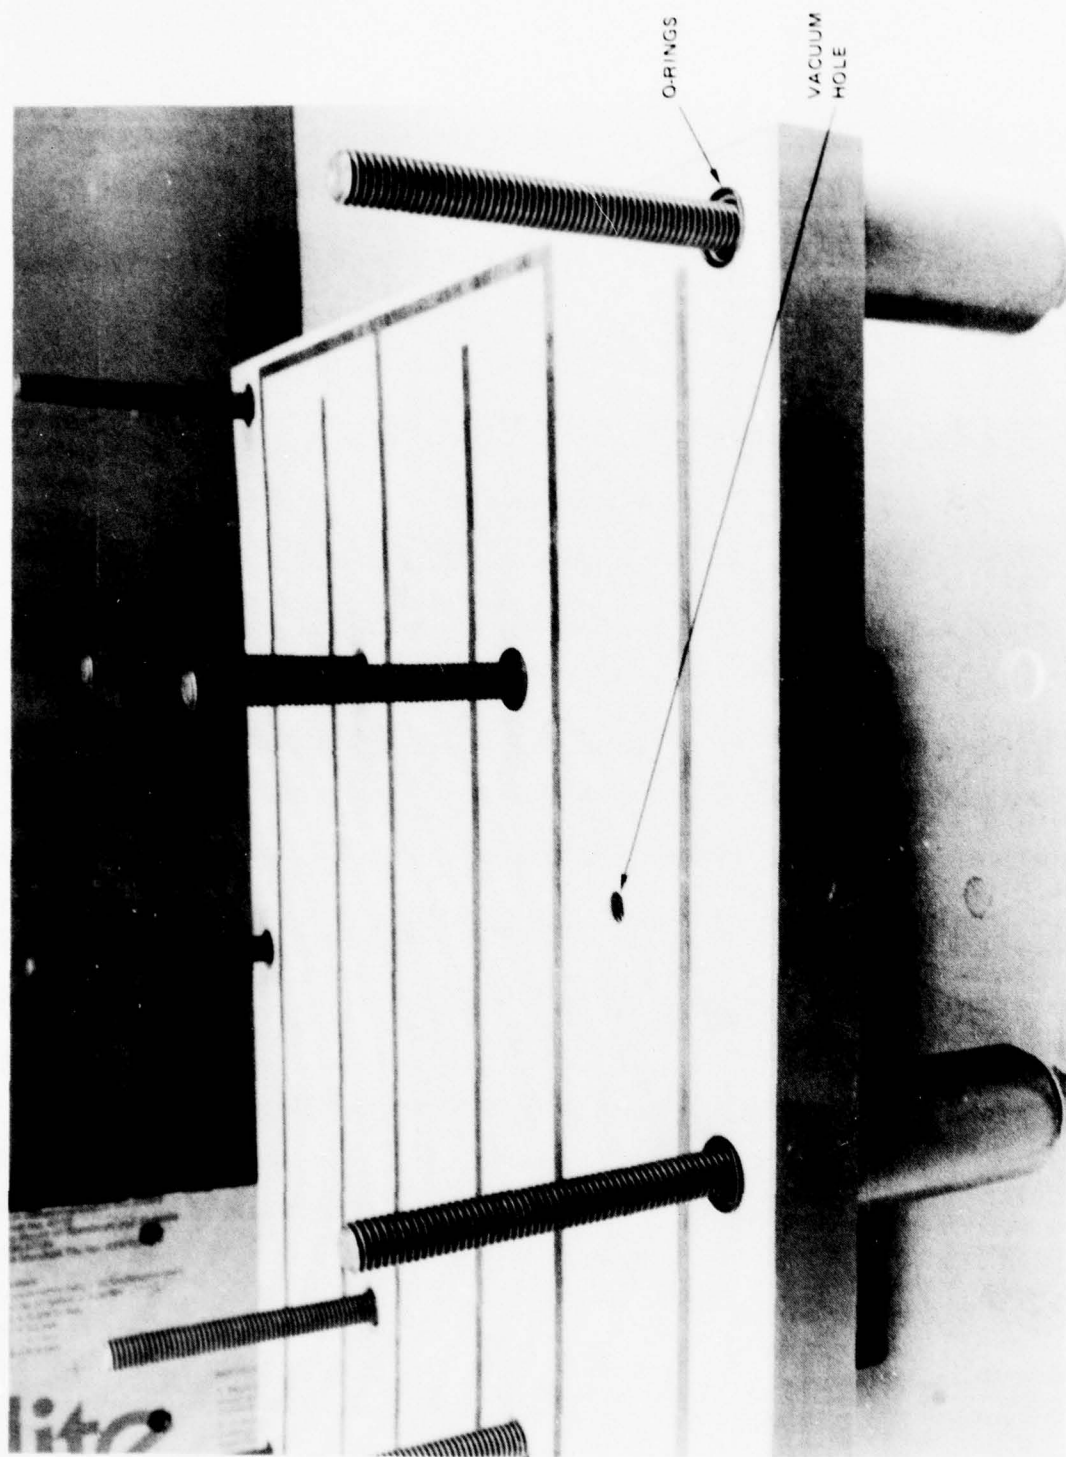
Fixture C in process of assembly, showing rear acrylic cover, PVC backing plate, printed circuit board in place and O-ring seals around studs.
